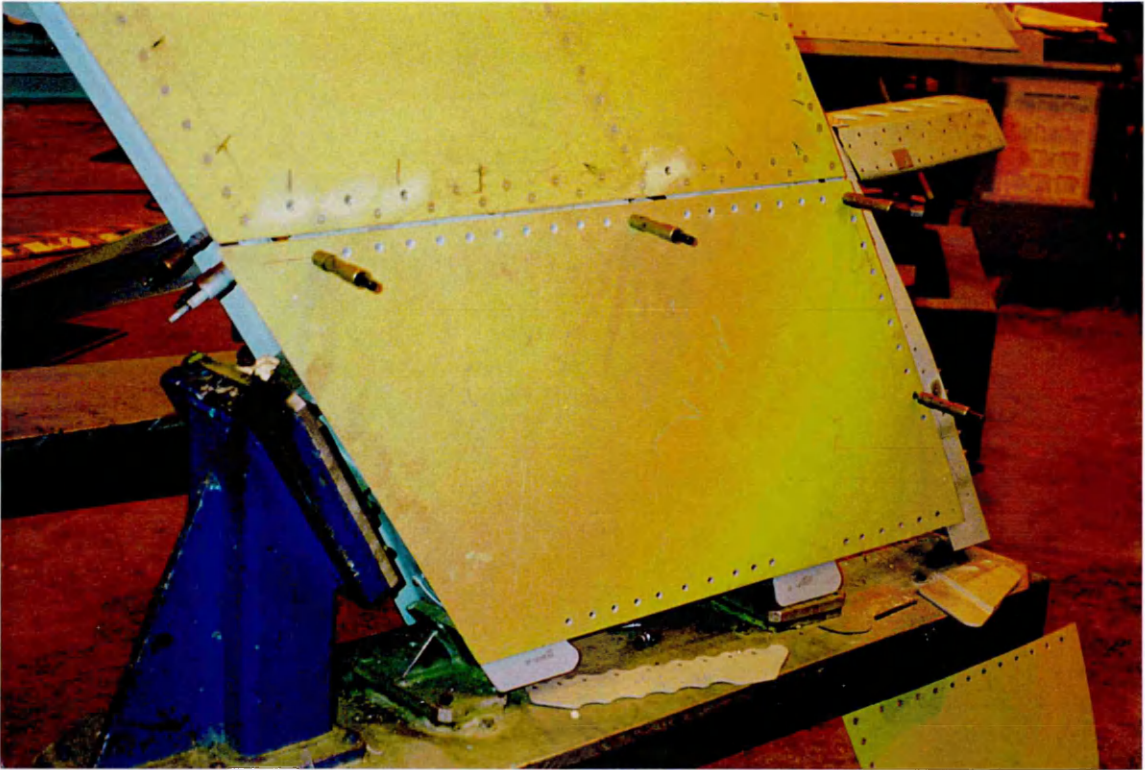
Frame work re-assembly in stage 02 assembly fixture
